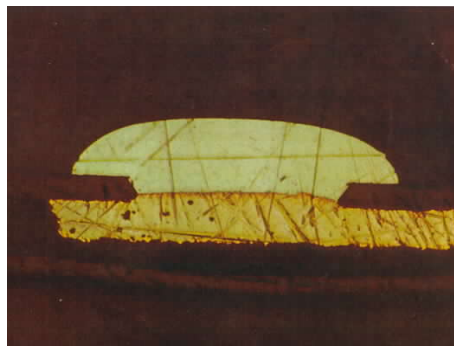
Cross Section Photo of the Dome Shape Bump with the Copper Foundation
